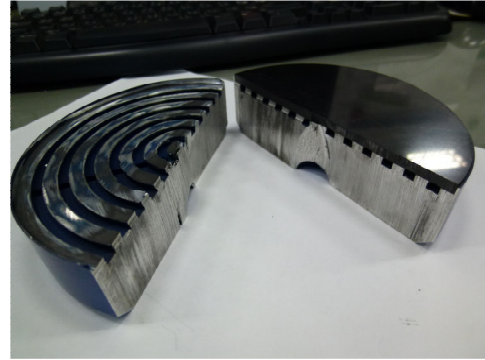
A sectional view of the flat round porous aerostatic bearing
